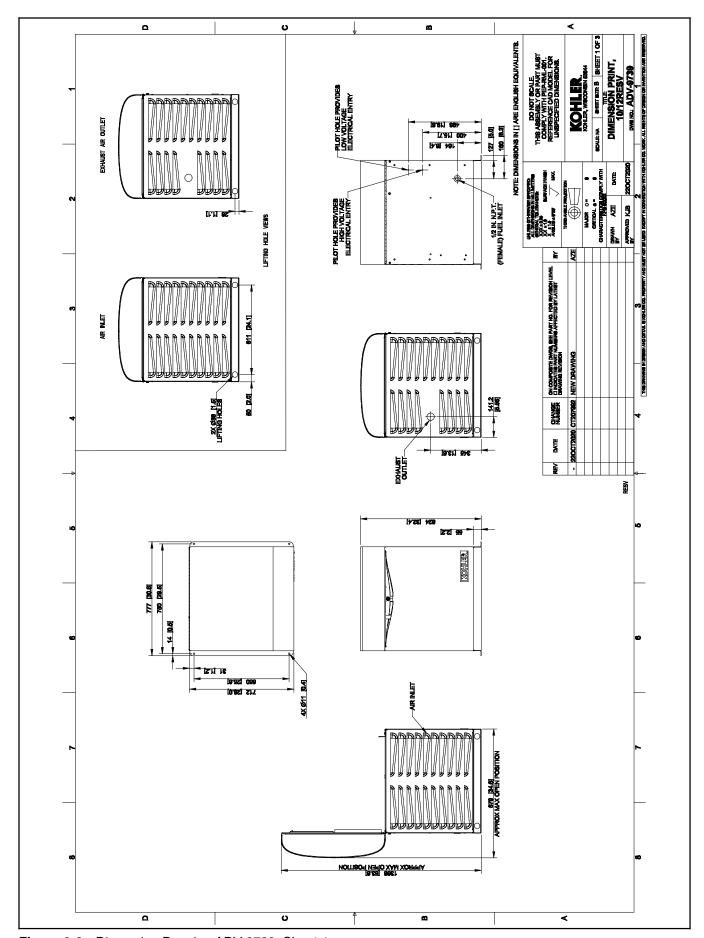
Dimension Drawing ADV-9739, Sheet 1
